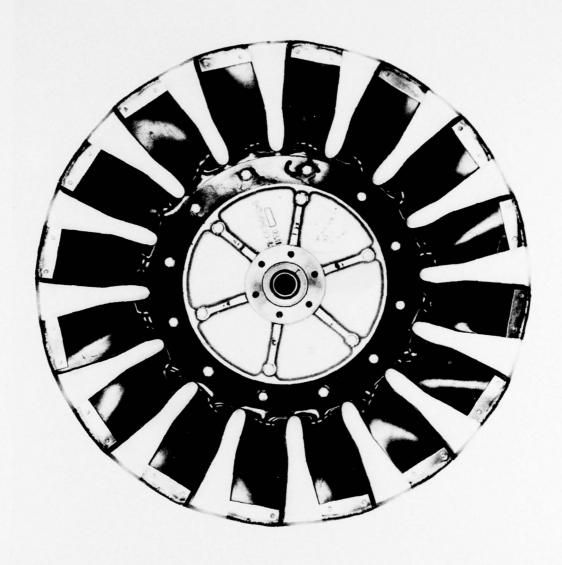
THE SHROUDED FAN FROM DOWNSTREAM SIDE
